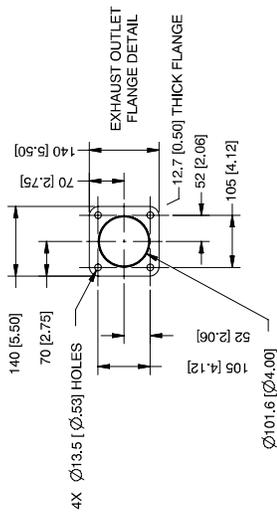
Dimension Drawing, 80/99EOZD and 70/80EFOZD
